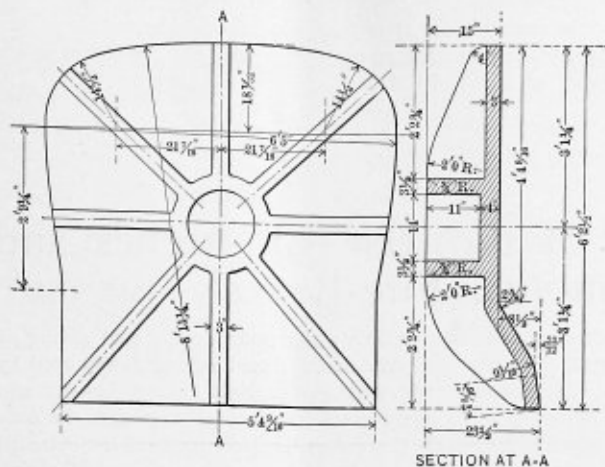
CLAMP DIE FOR BACK FLUE SHEET
